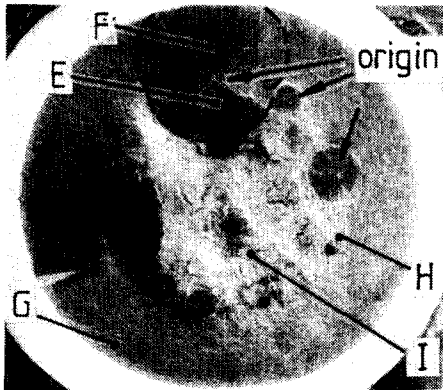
Schematic illustration of rotating bending fatigue fracture
